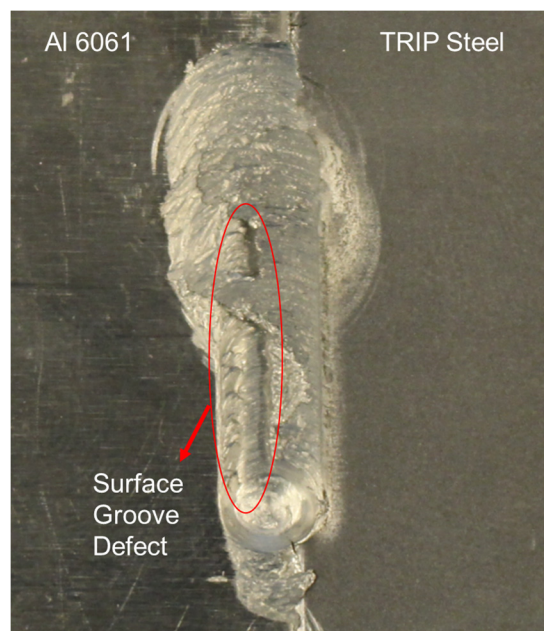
Weld samples obtained from rotating speed of 600 rpm
